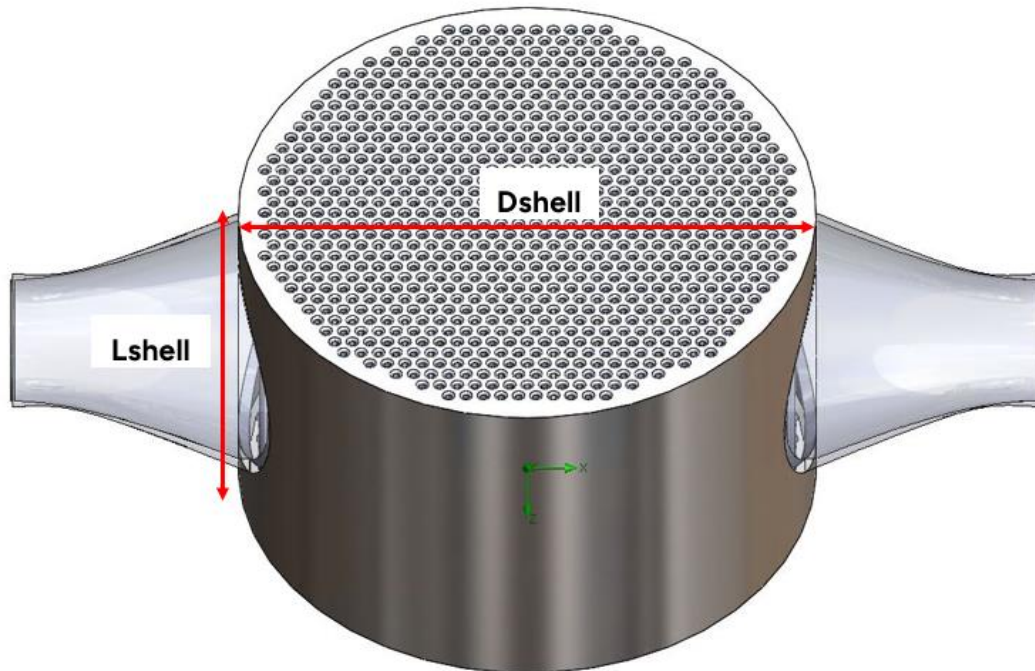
3D CAD model of the compact shell and tube heat exchanger.
